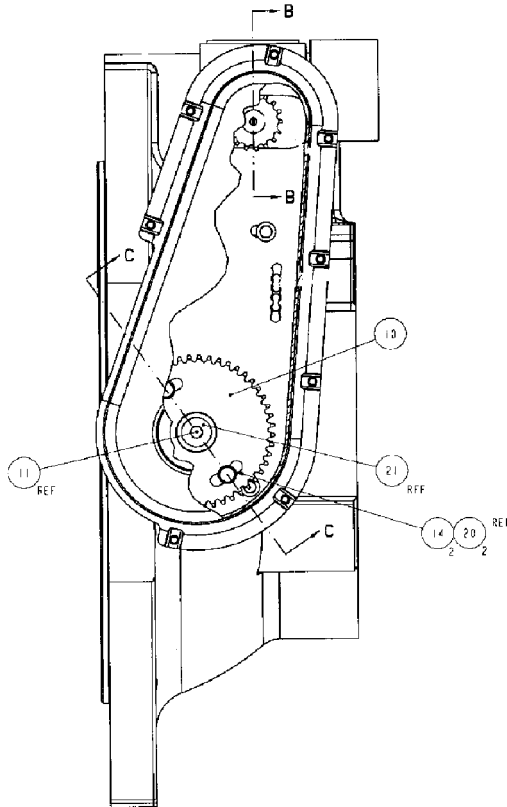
02XR34002701 IGV Actuator Assembly Shown
